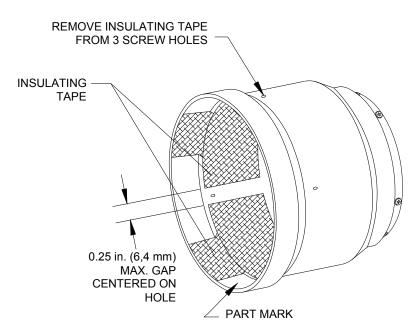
Inspection of Air Inlet Insulating Tape (P/N 23081-1571 and -1576)
